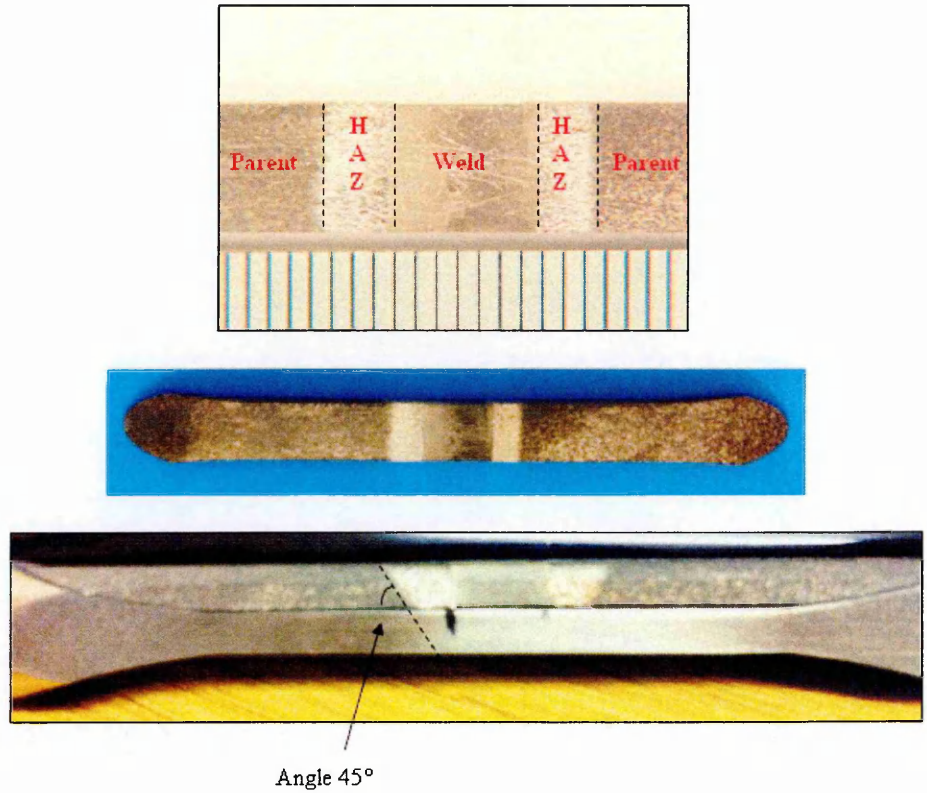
Photograph (upper) showing the metallographically prepared sample cut from the side of the bottom position specimen gauge length, and photograph (lower) showing edge view of creep specimen and removed piece.
